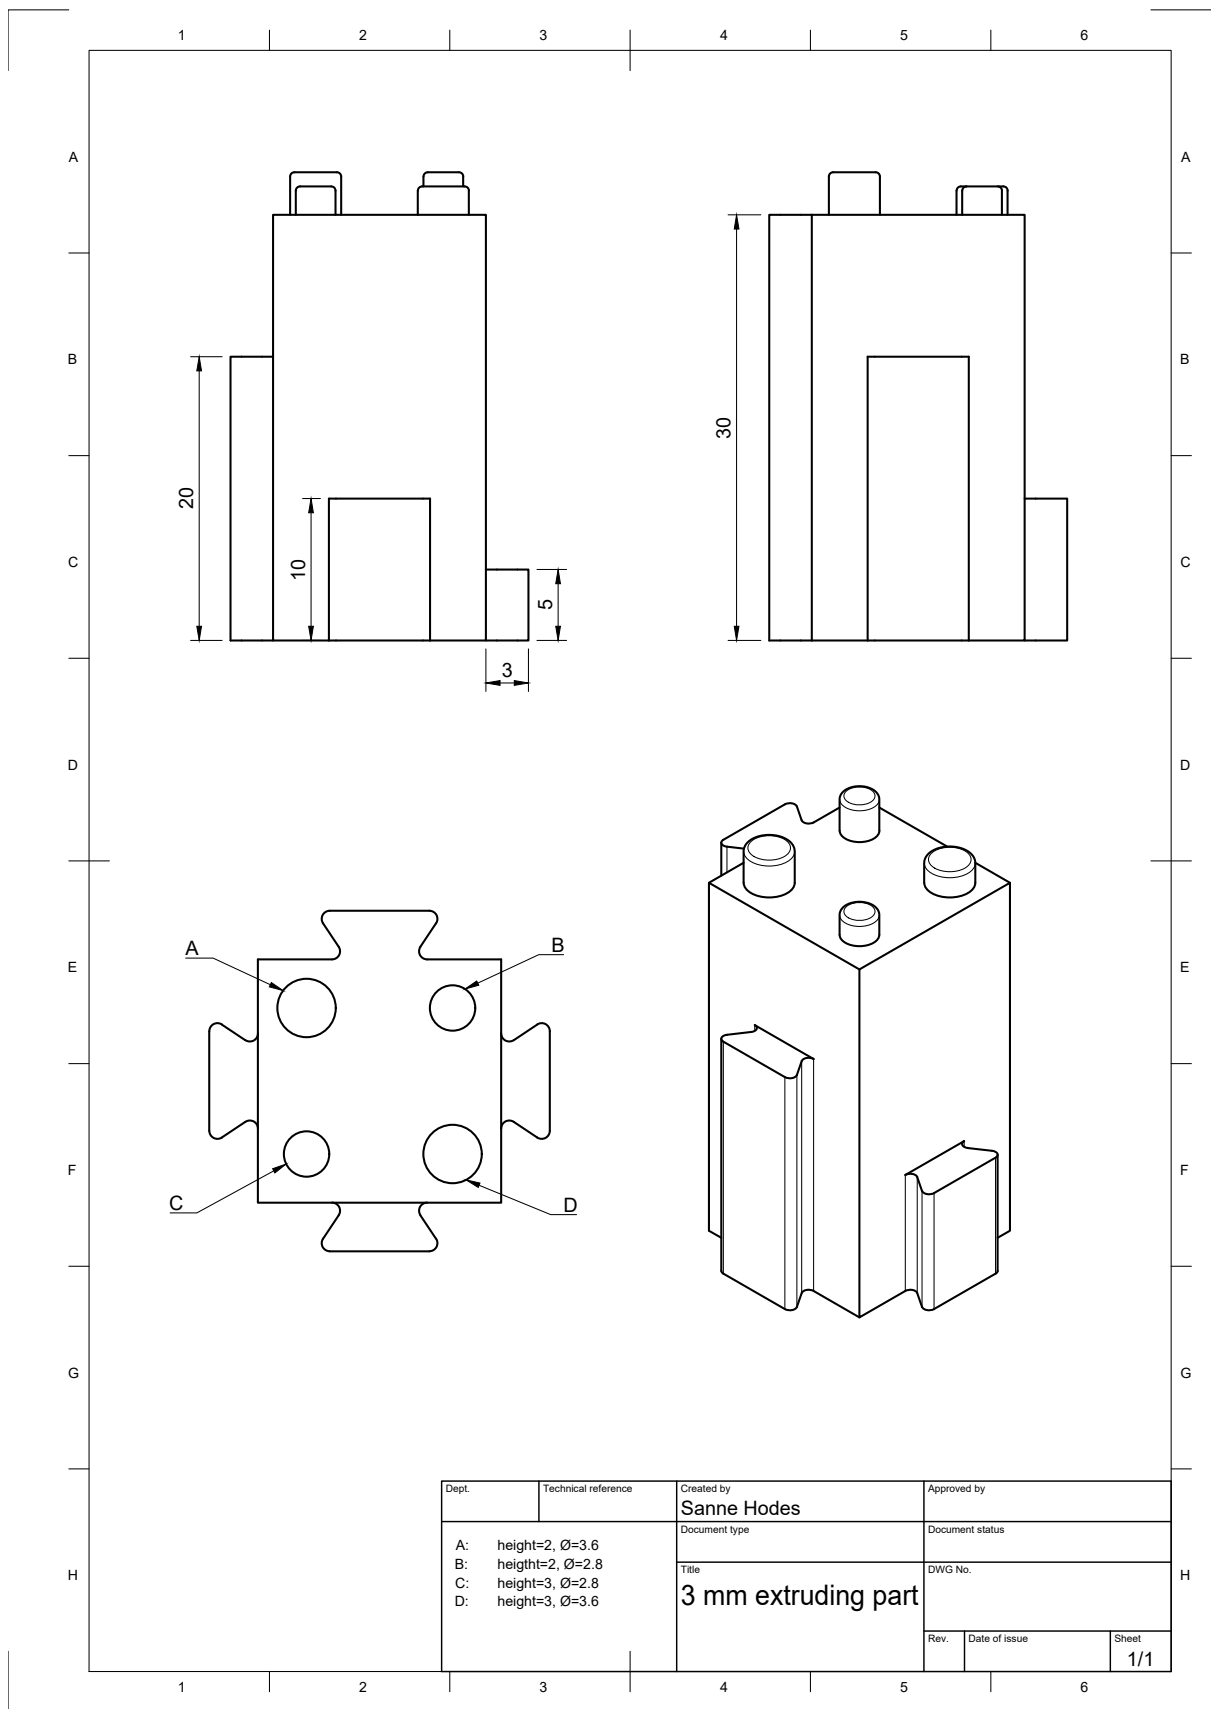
Technical drawing of the test cube with the 3 mm extruding part
